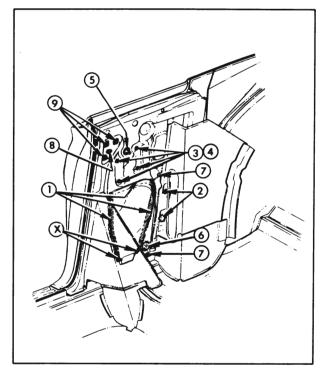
Quarter Inner Panel Sealing—"67" Styles
